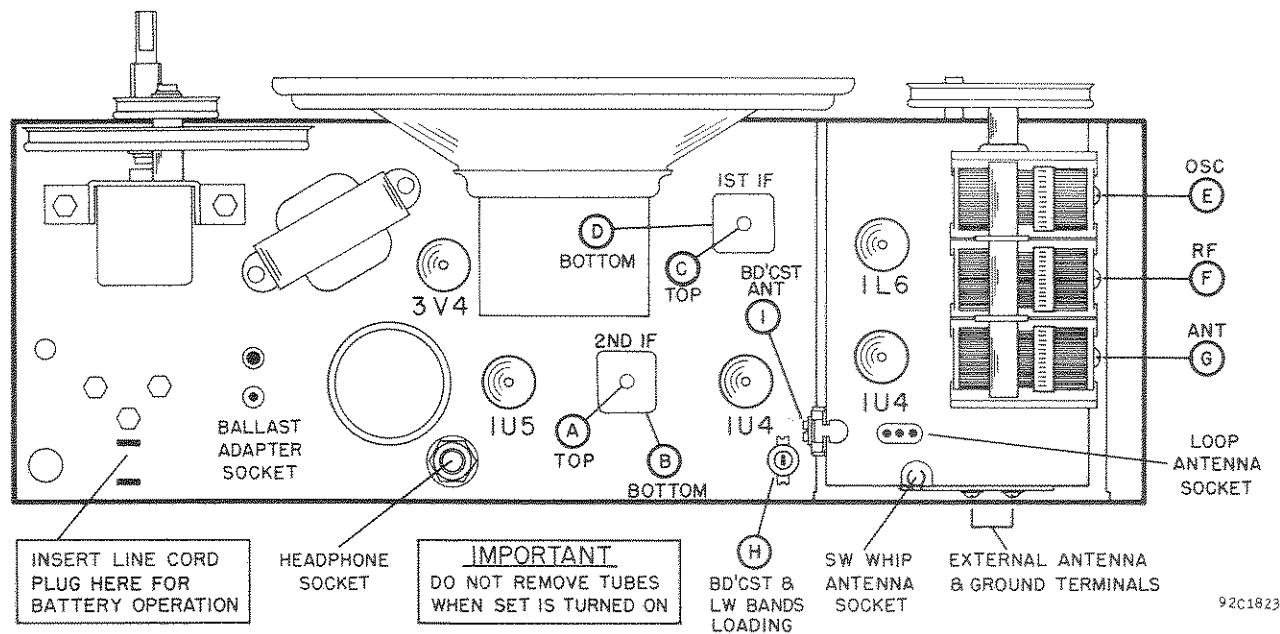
Top View of Chassis Showing Location of Alignment Adjustments and Tubes
